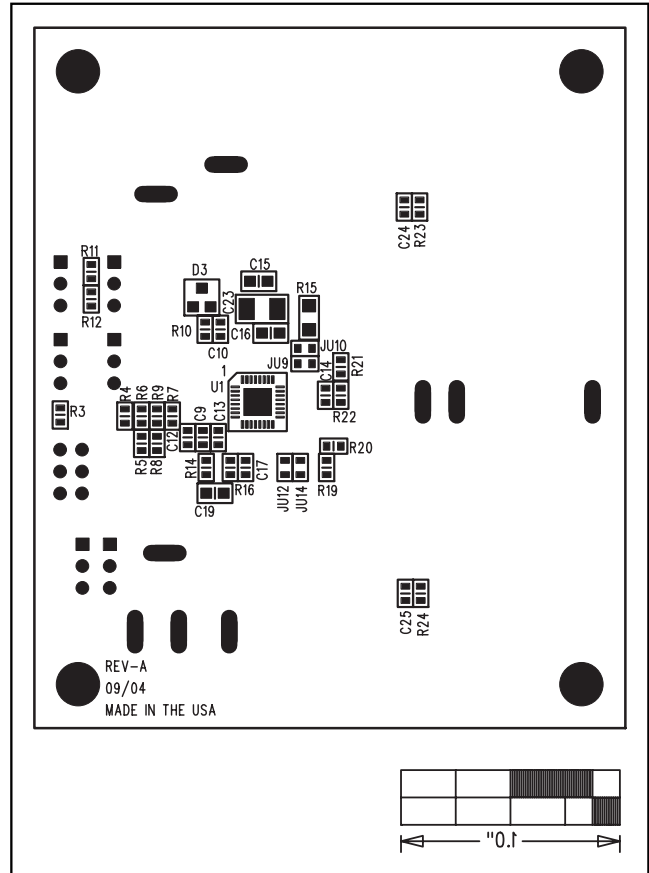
MAX1533 EV Kit Component Placement Guide—Solder Side
